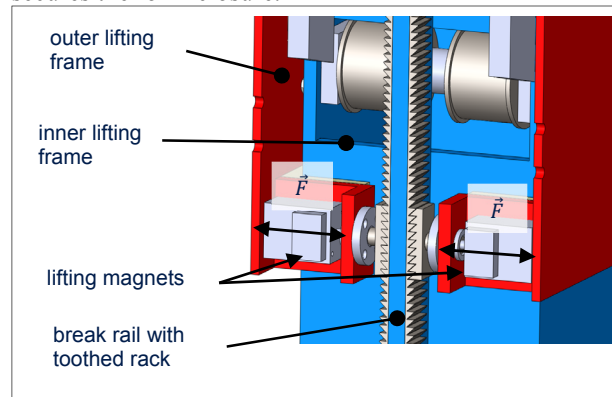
Load-holding function by saw-tooth gearing, actuated by lifting magnets
